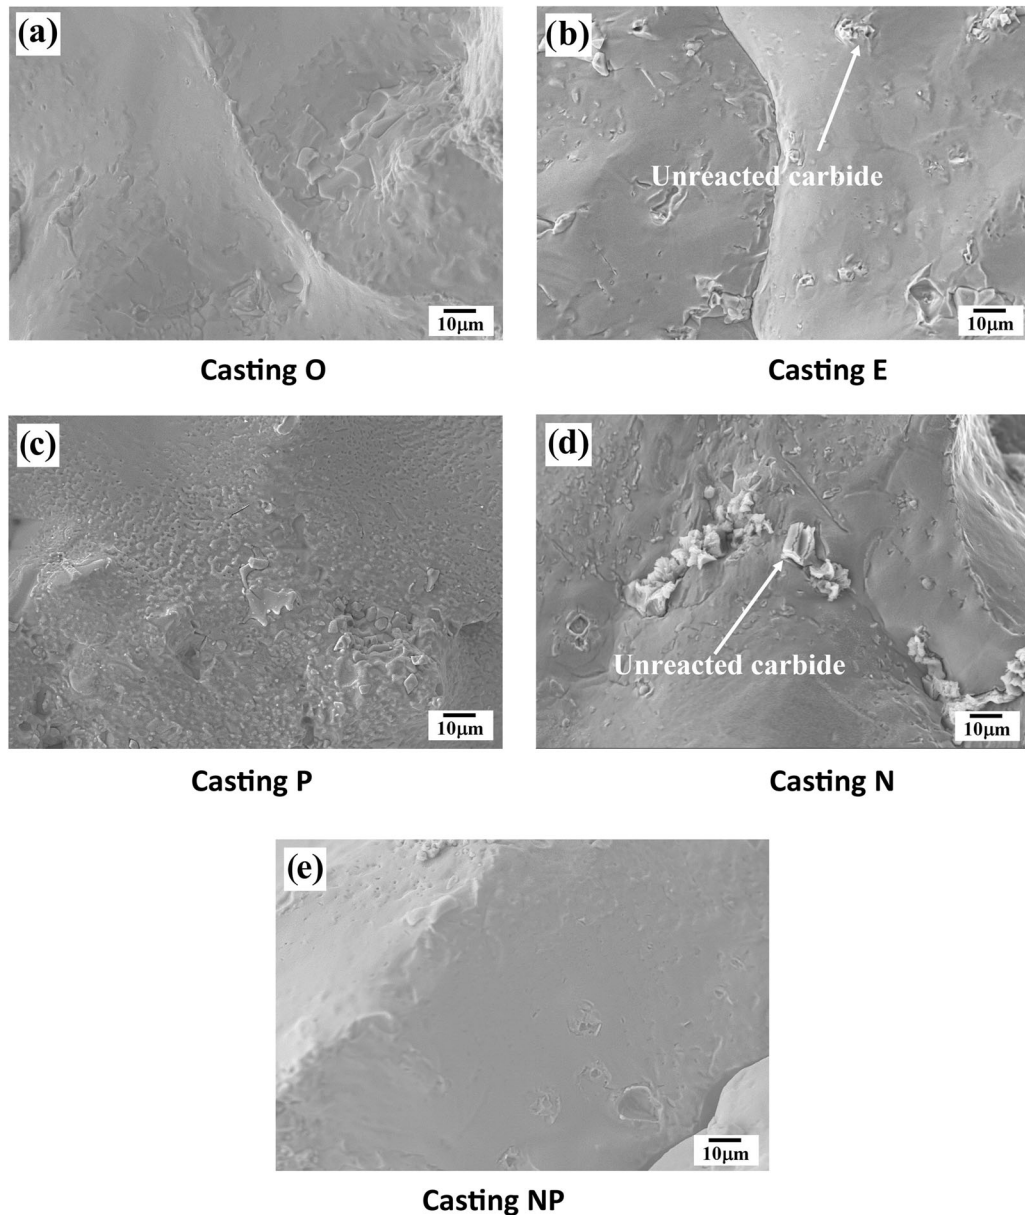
Fracture surfaces of on-heating samples pulled at 1150 °C: (a) casting O, (b) casting E, (c) casting P, (d) casting N, and (e) casting NP.
